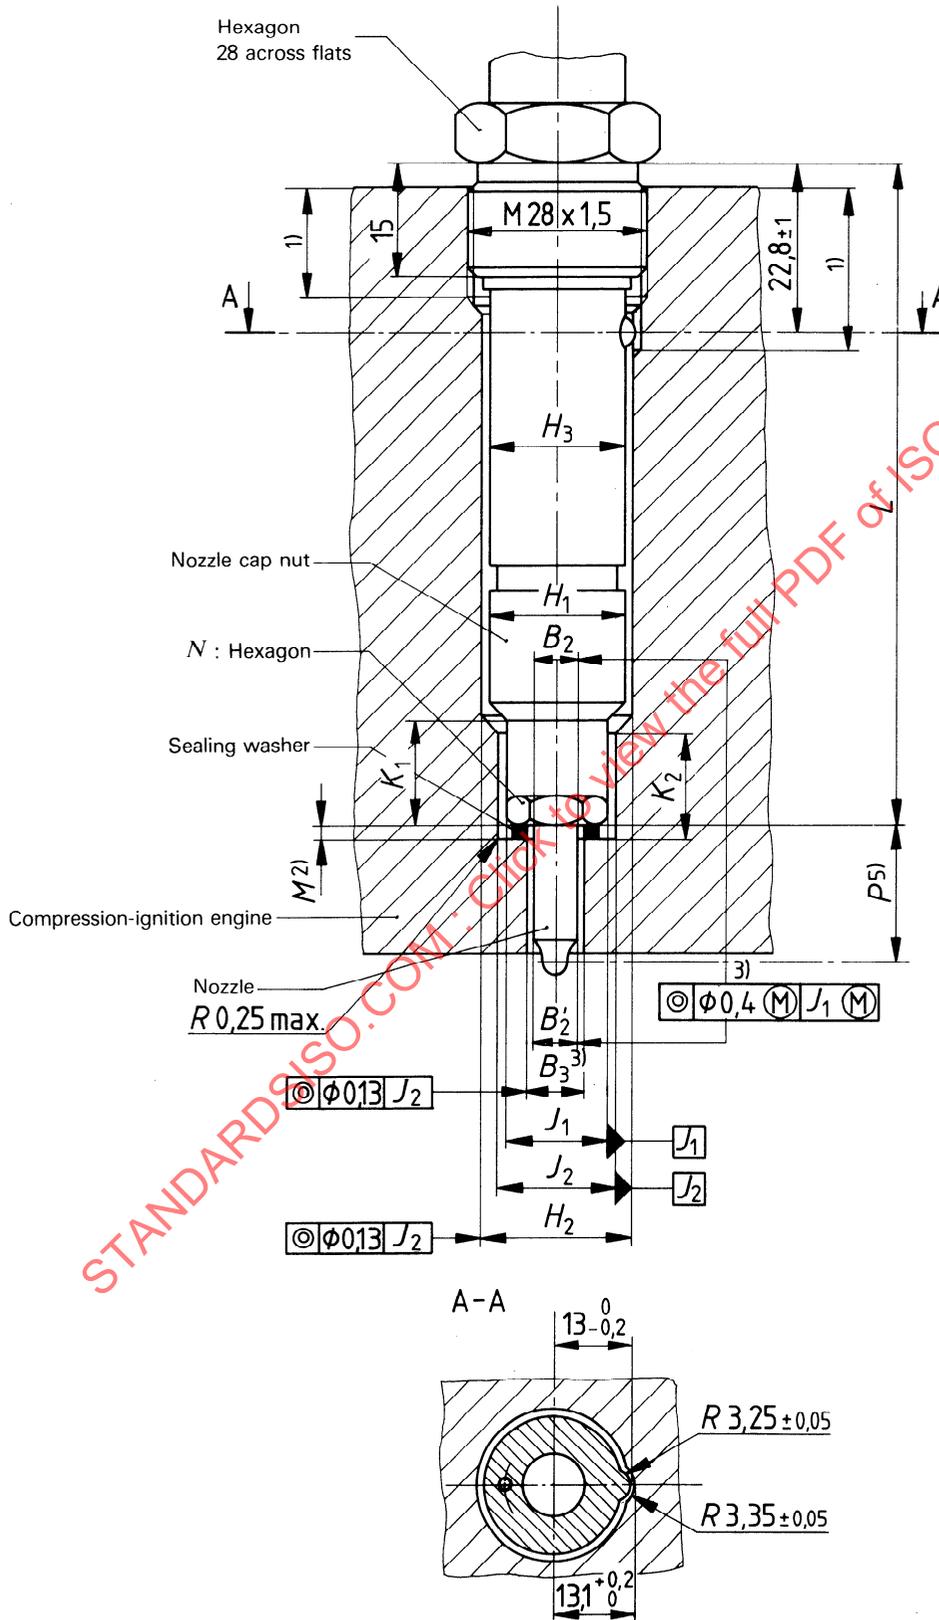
Screw-mounted nozzle holders, types 16 and 17
